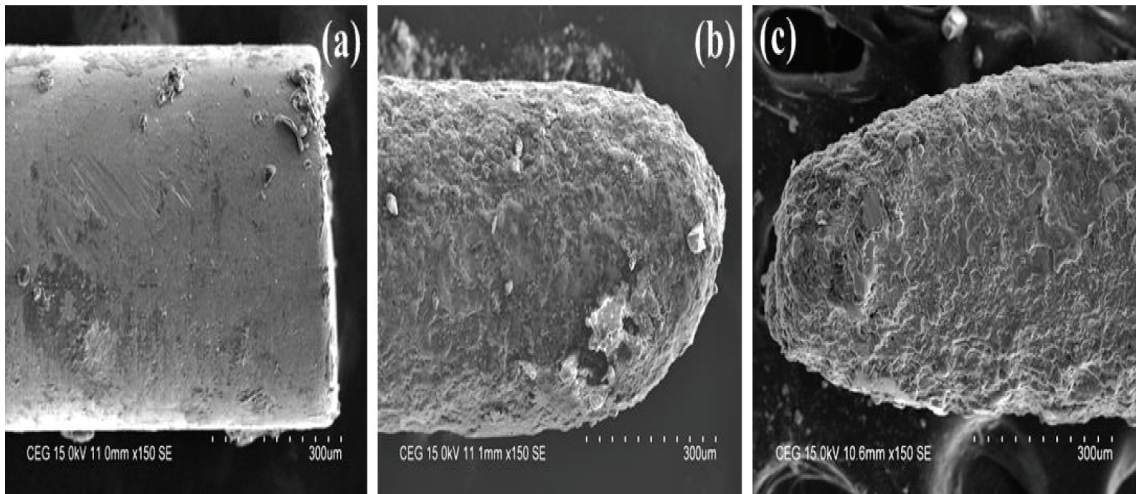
(a) Electrode before machining, (b) uncoated electrode edge after machining, and (c) coated electrode edge after machining.
